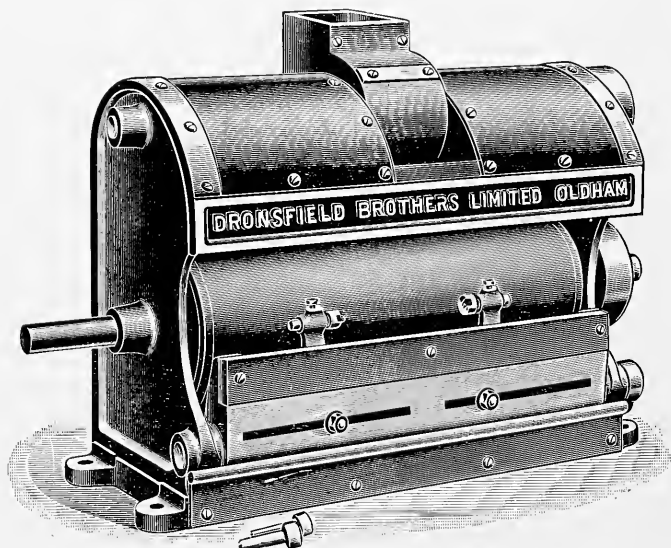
Patent Roller Ending Machine, with Fan, No. 47
